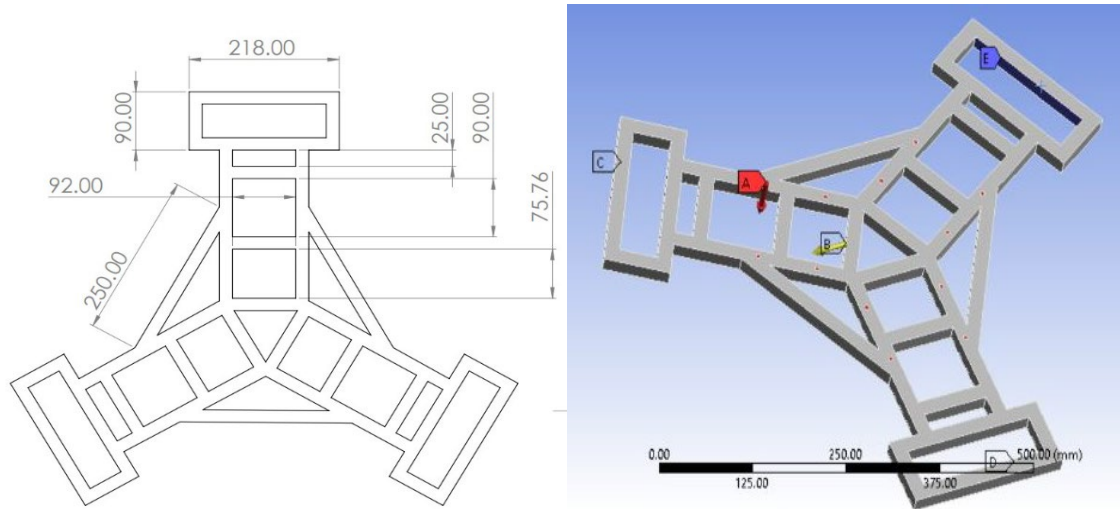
(a) Chassis Drawing, (b) application of forces, acceleration and fixed support on the chassis
